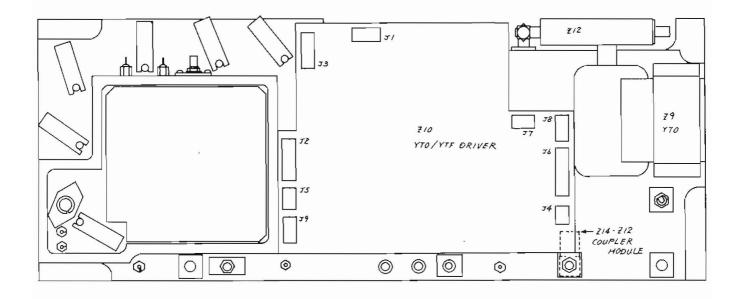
Z9, Z10, and Z14-Z12 Parts Layout
